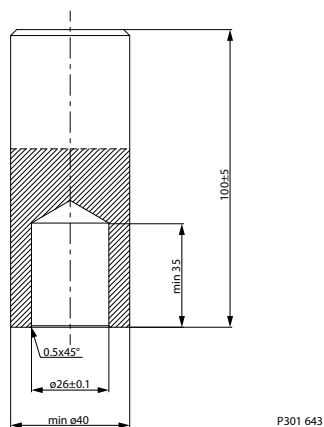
Assembly tool for shaft seal: O-ring / RotoGlyd type for OSPM and OSPMS
